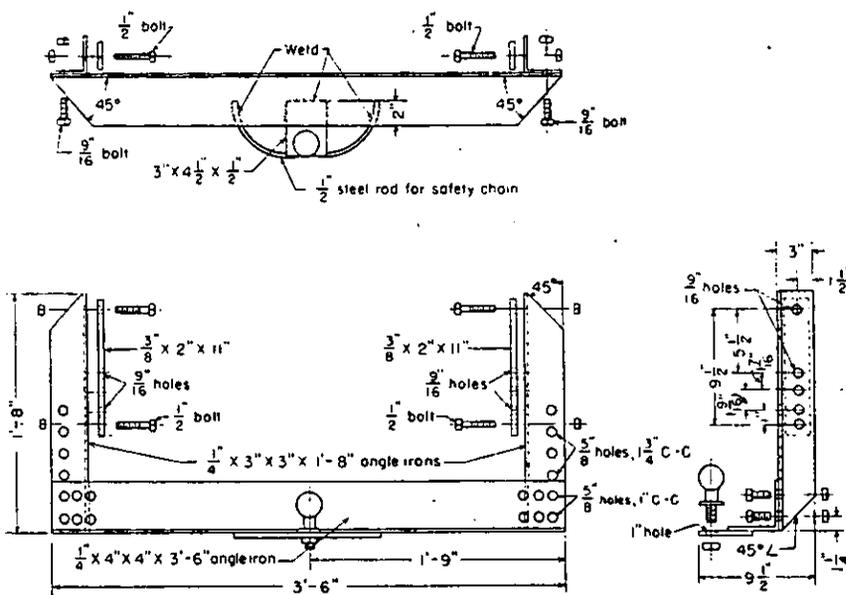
Construction details of adjustable trailer hitch assembly.
